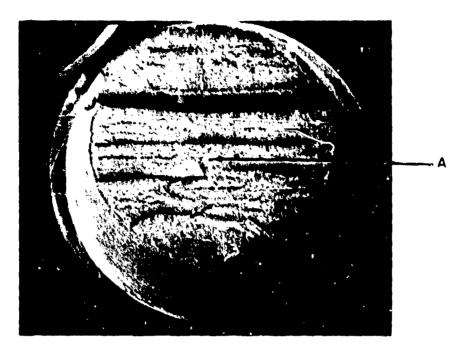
Tensile fracture surface of a temper-embrittled HY-130 specimen, 8x.
